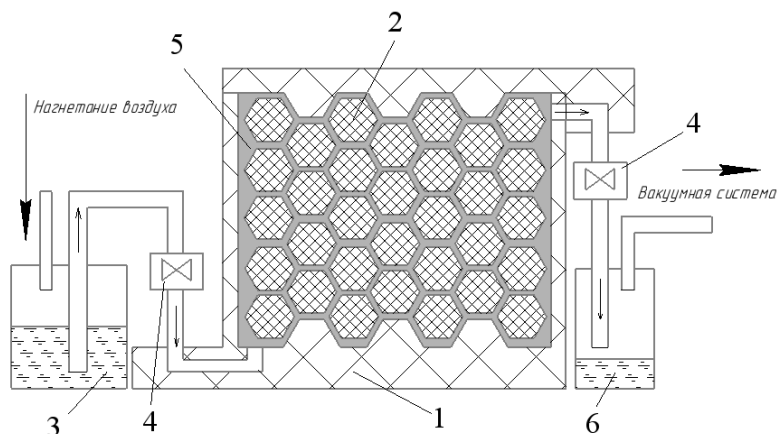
Scheme of manufacturing a honeycomb filler from PCM by the RTM method:
